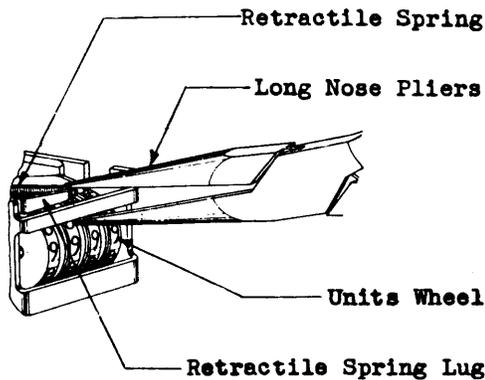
Method of Adjusting Retractable Spring Lug Downward
